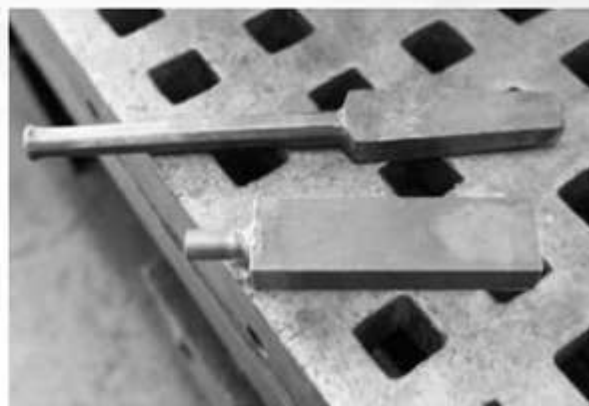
A finished drift and a piece of flat bar stock for making another. Note that the bar stock has a short piece of 1 inch round stock welded on to make it easier to handle the flat bar during forging. The extension can be cut off when no longer needed.
